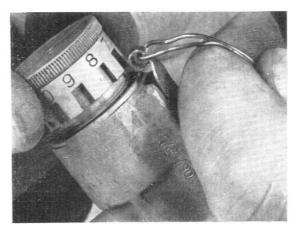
Using locking wire to hold locking spring clear of notches in adjuster plug.
